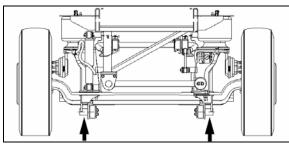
JACKING POINTS ON FRONT AXLE – I BEAM AXLE
